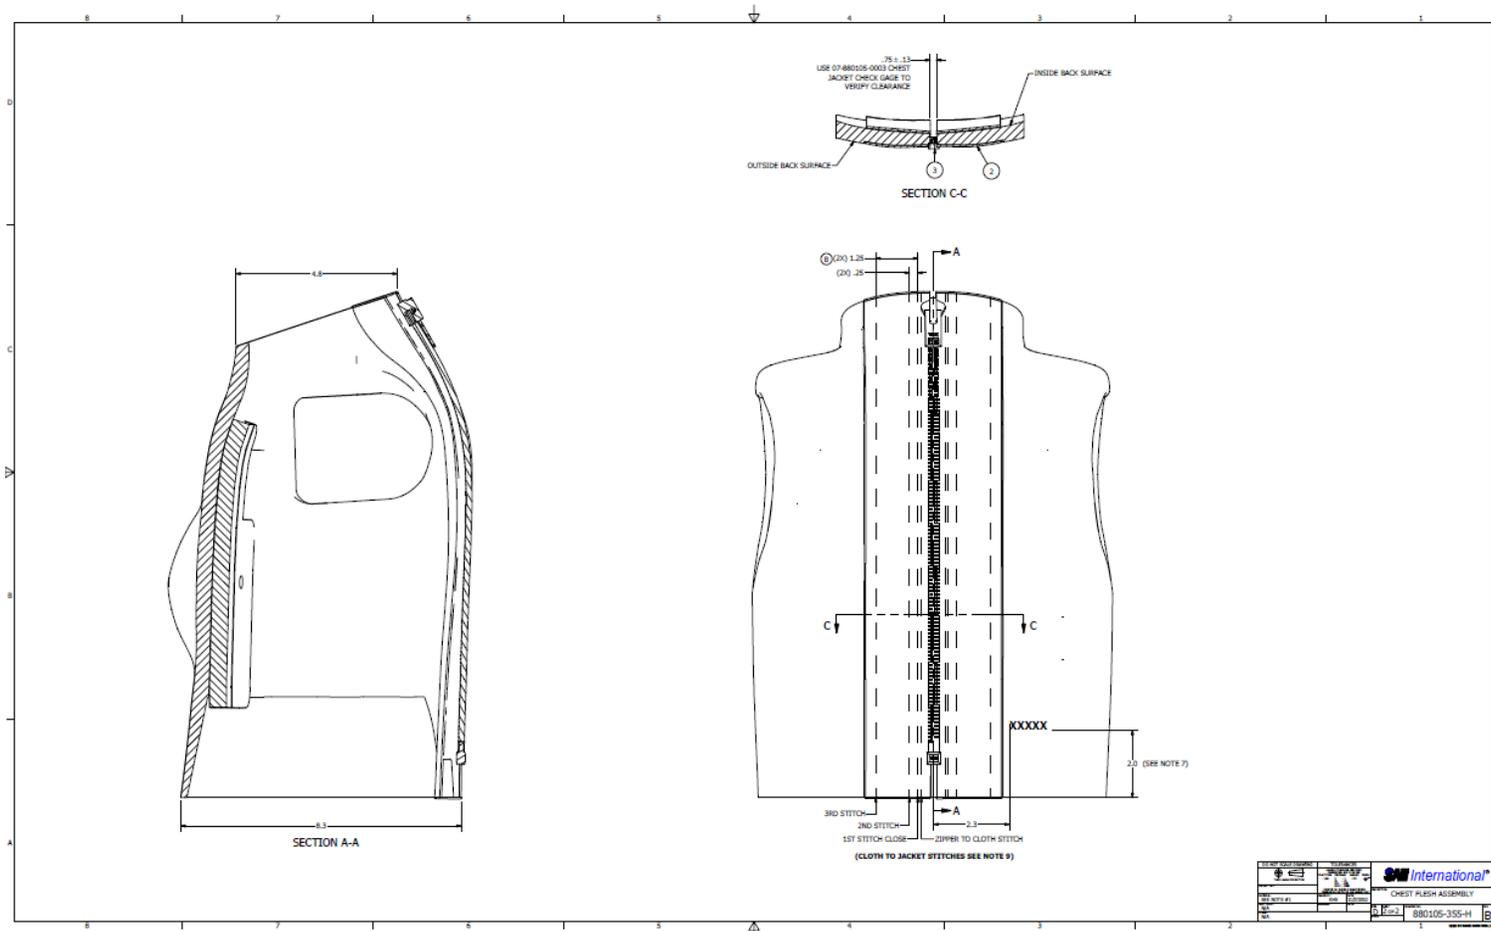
SIDE VIEW OF CHEST JACKET
